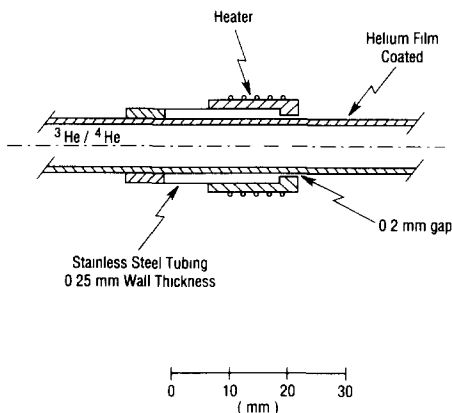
Schematic diagram of the film burner installed between the helical heat exchanger and the mixing chamber.
